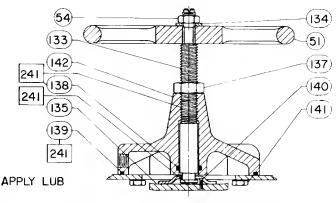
Top Mounted Handwheel Assembly for Size 30 Through 60 Actuators
